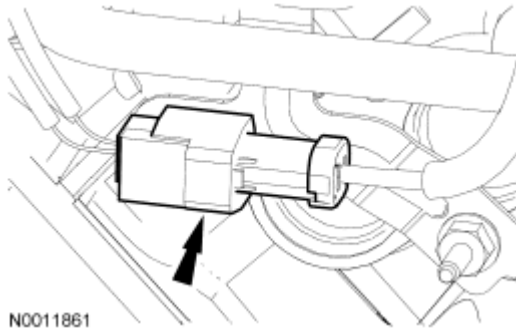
Locating Knock Sensor (KS) Electrical Connector And Pin-Type Retainer
